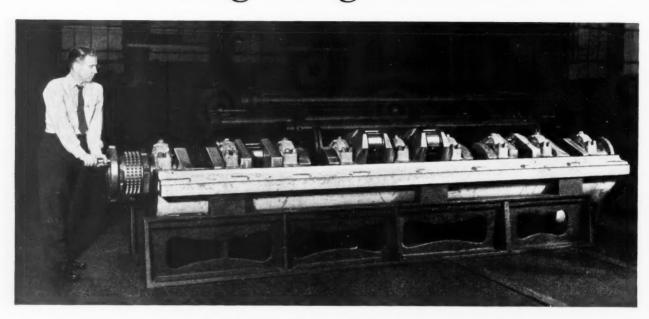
This Diesel engine crankshaft installed in an engine base with precision plain sleeve bearings is easily rotated by hand.
